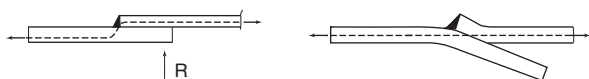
Single Fillet Weld Subject to Bending
